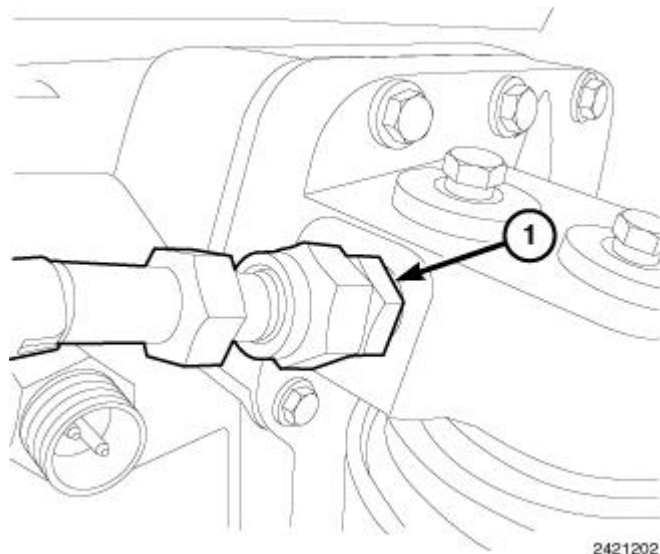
Identifying Turbocharger Oil Supply Line At Oil Cooler Housing
